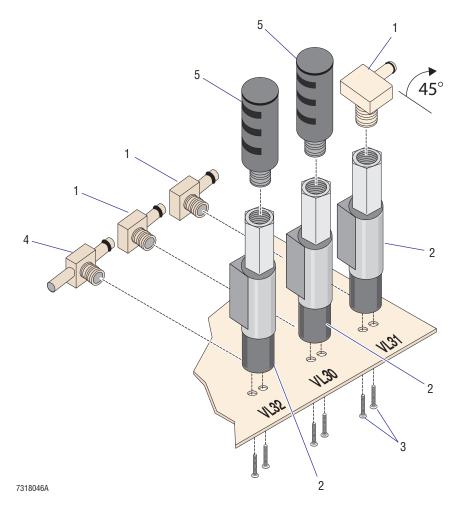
VL32, VL30, and VL31 - Exploded View (See Table 8.2-46)
